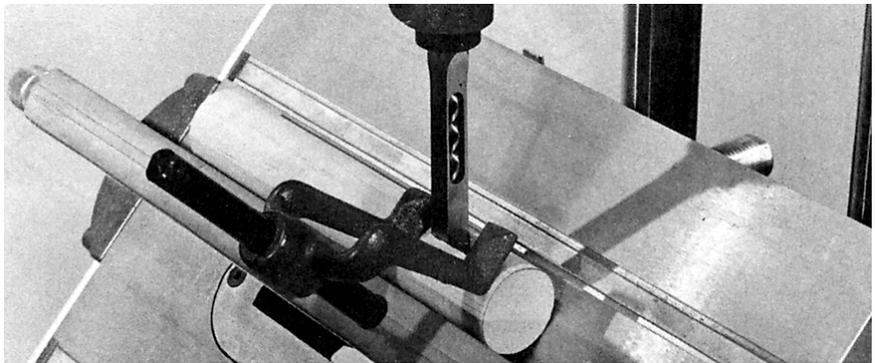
The fence/table V-block arrangement can be used to hold round workpieces for mortising. Be sure to mark the workpiece so the cuts will begin and end on the same line.
